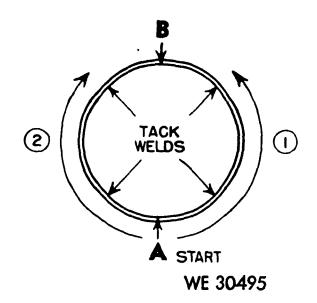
Diagram of horizontal pipe weld with uphand method.
